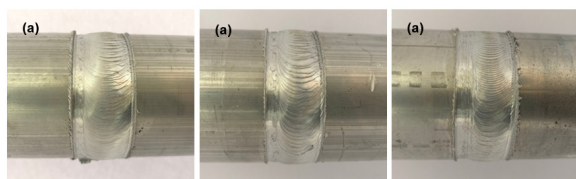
Surfaces of weld joints at welding speed of (a) 1.5 mm/min (b) 2.5 mm/min and (c) 3.5 mm/min
